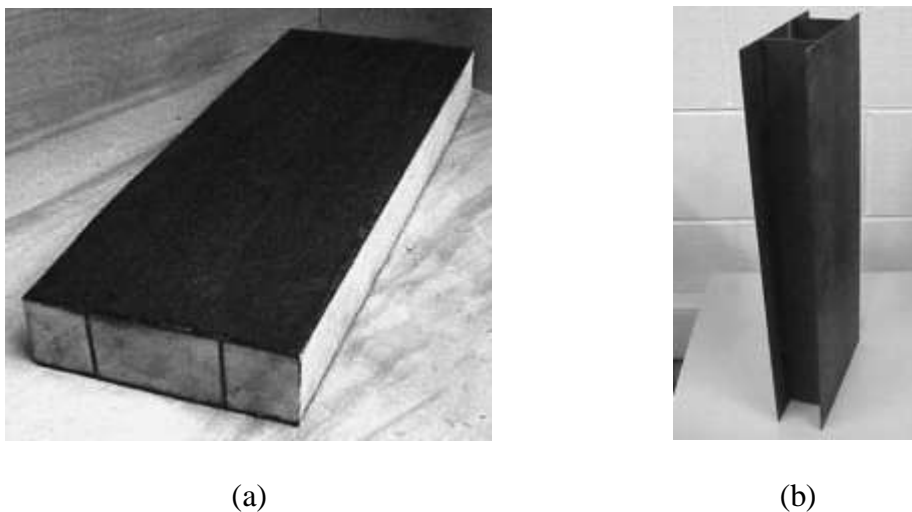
Photographs of Co-cured Skin Stringer Assembly (a) before foam removal (b) after foam removal [17]
